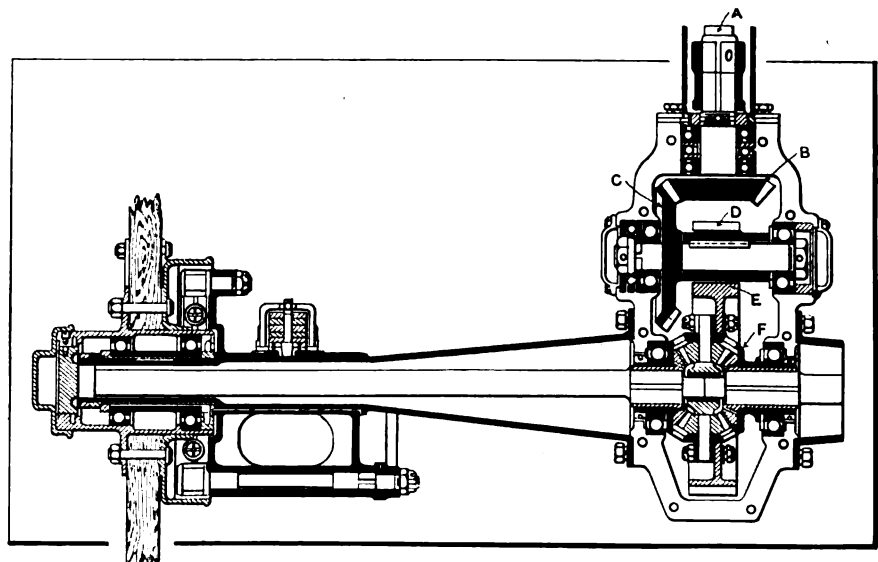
Section through a live rear axle showing the method of operating the driving pinion by straight tooth gears
